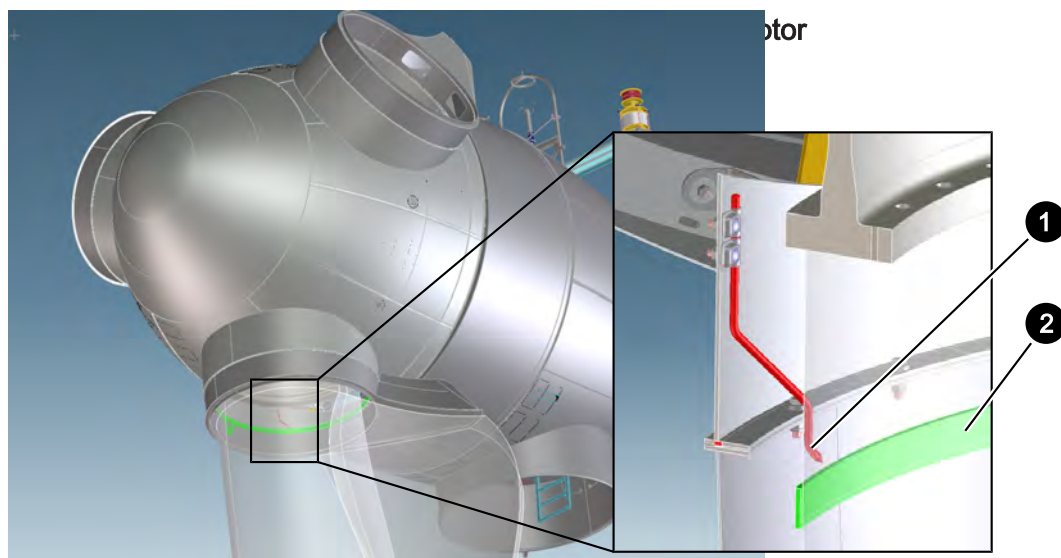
Discharge ring at blade joint (E-44 to E-115)
